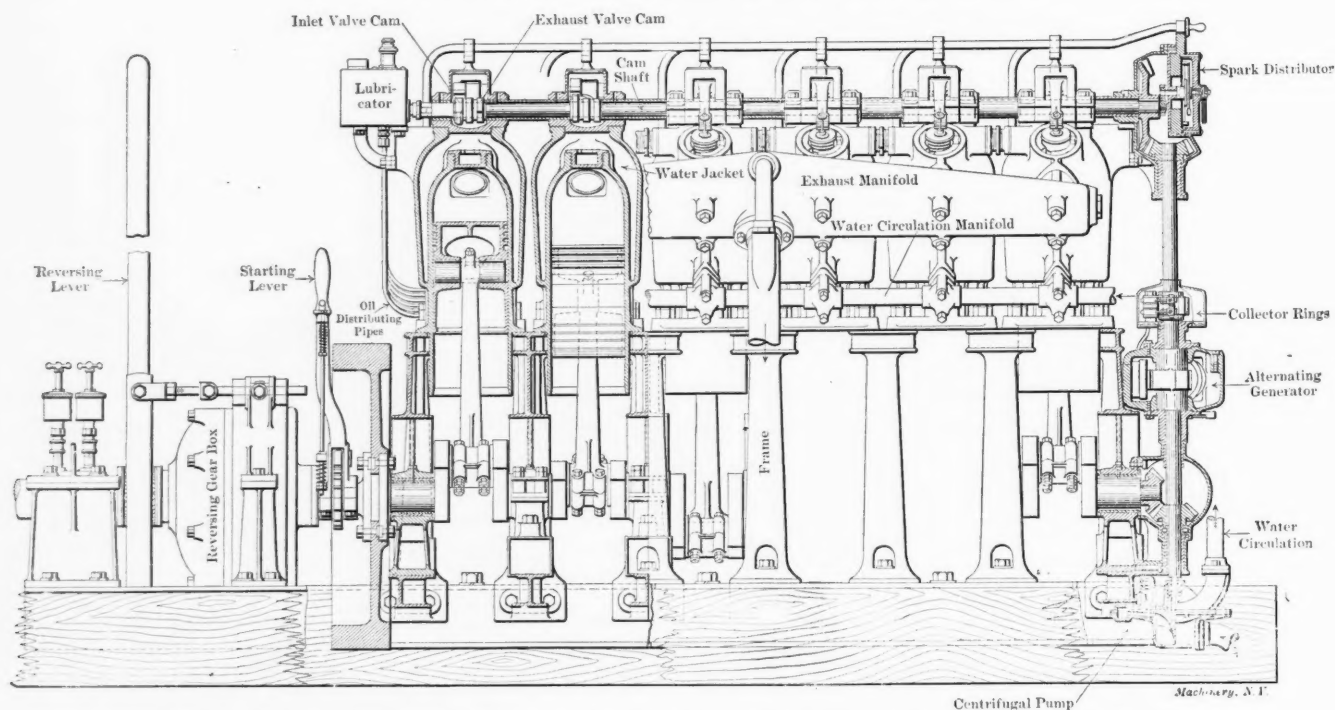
Side Elevation of Hurd & Haggin Six-cylinder Engine, showing the Exhaust Manifold and Section of Cylinders.
